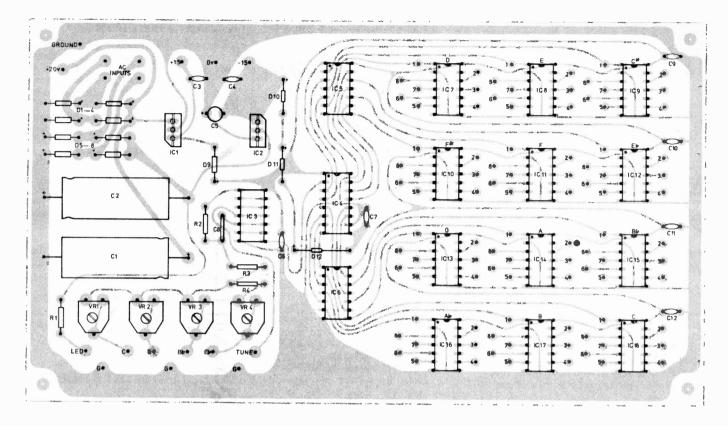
Component layout of P.S.U./Tone Generator p.c.b.
